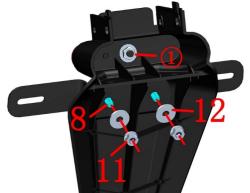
REAR COVER COMPONENT		Rear mud plate assembly 2	CHK	401
